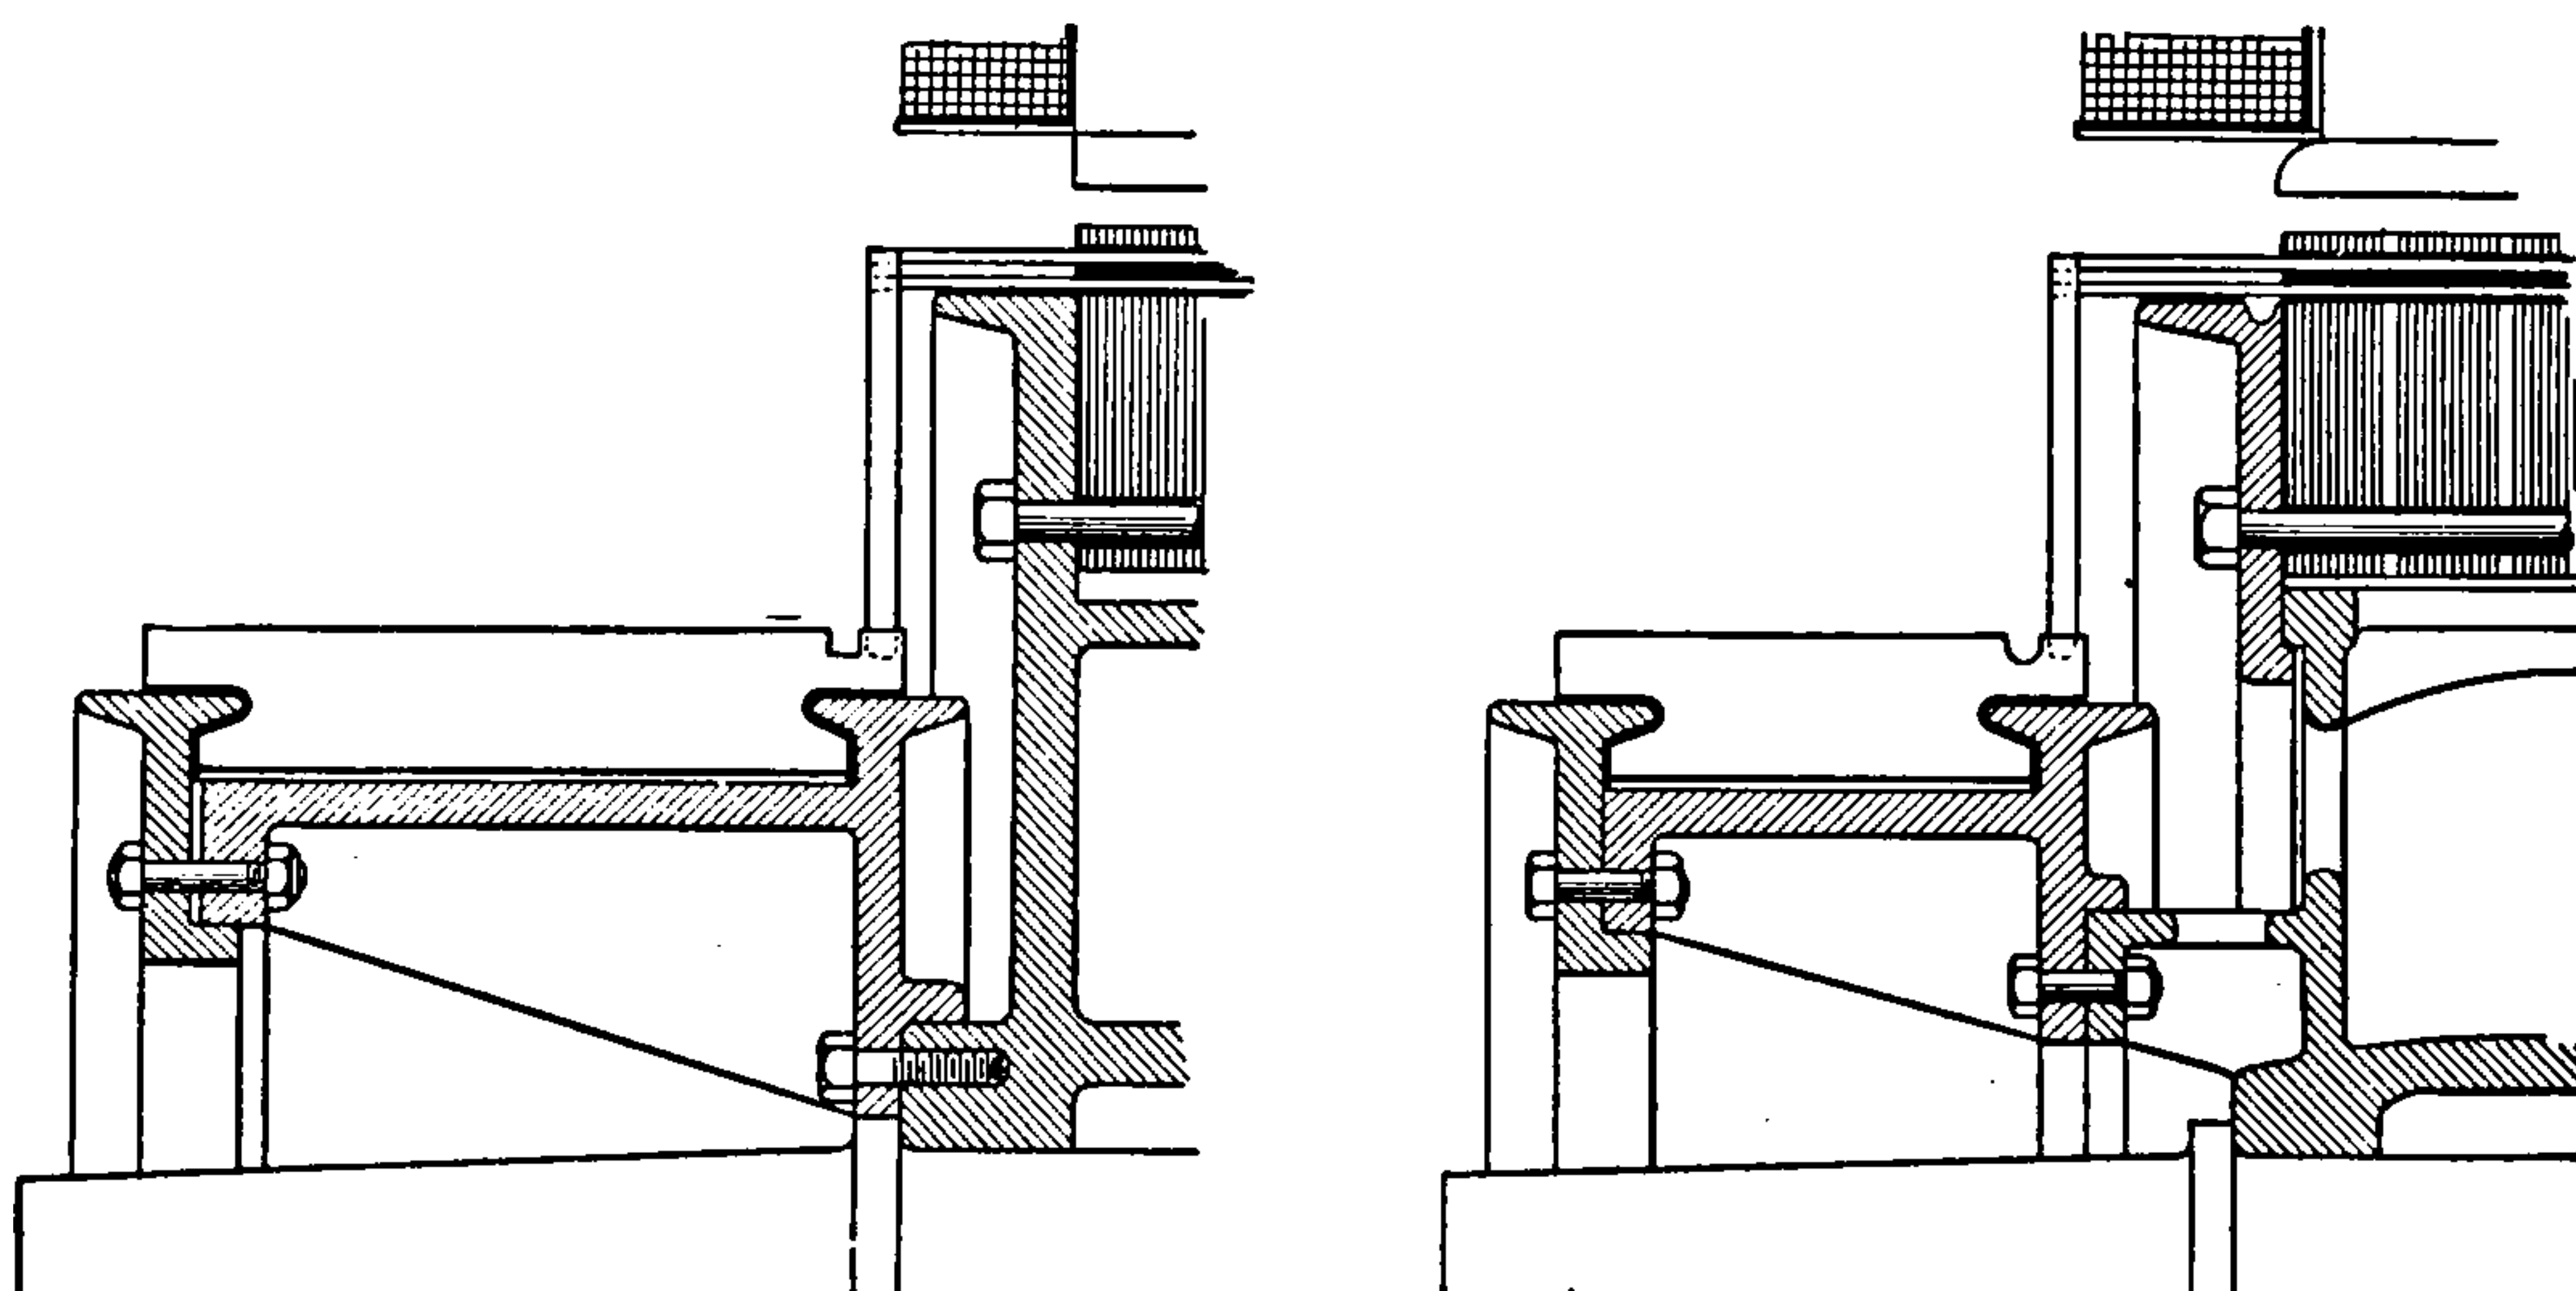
Commutator Construction for Large Machines. Support for Commutator is Bolted to Armature Spider
